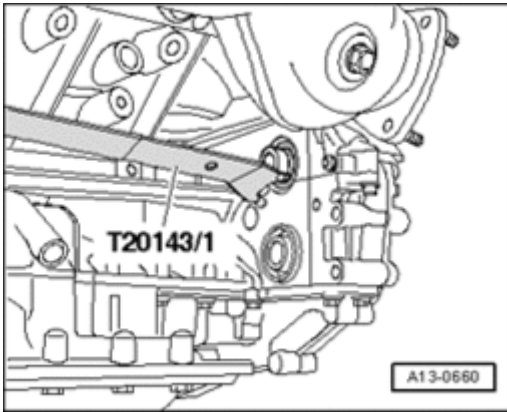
Prying Out Sealing Ring For A/C Compressor Drive Using Pulling Hook T20143/1
